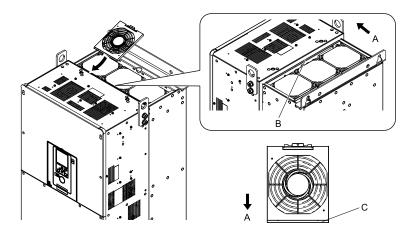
Put the Cables and Connectors in the Drive Recess
